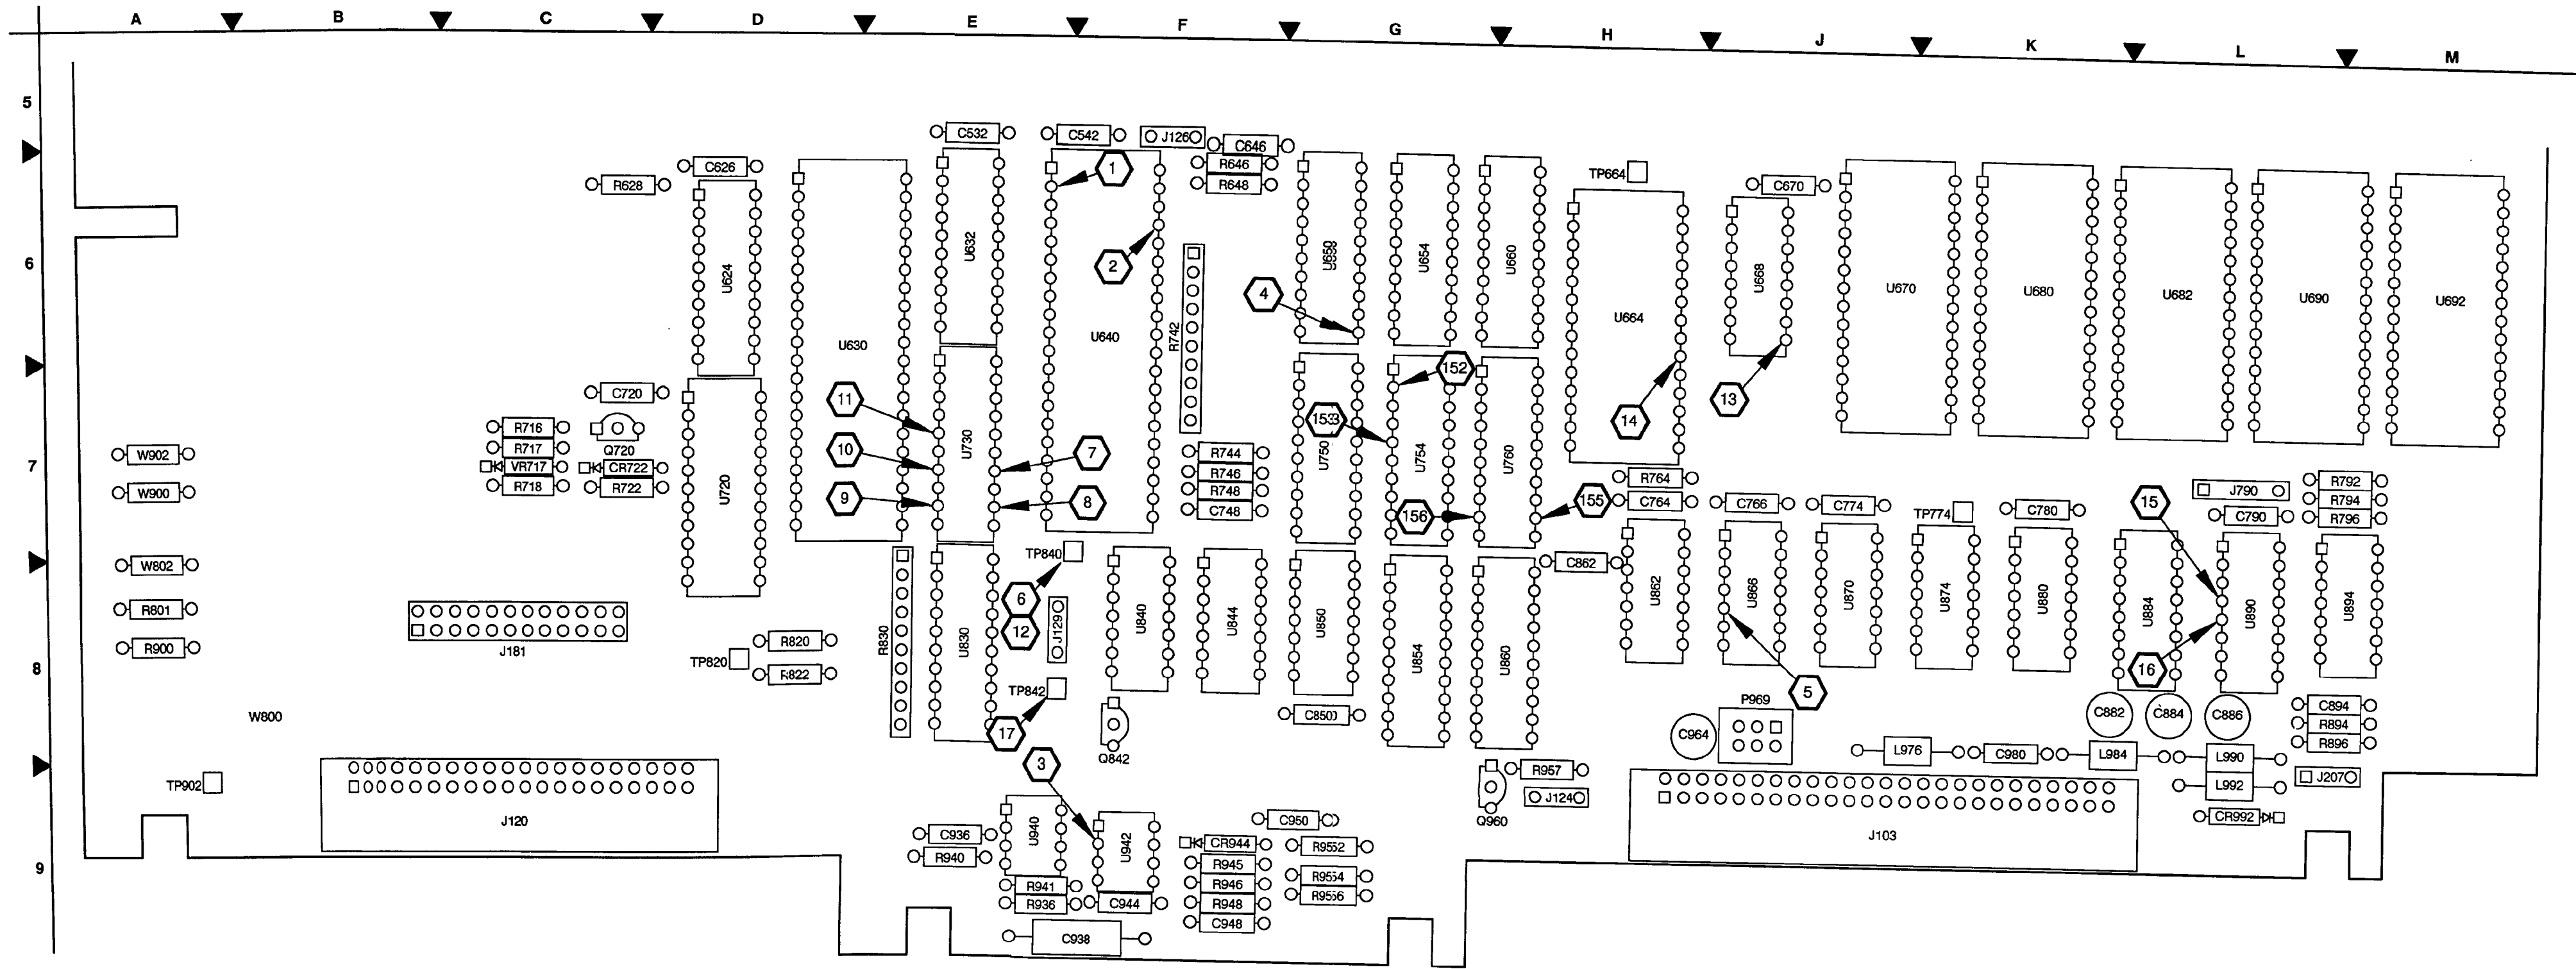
A12 Processor Board Component Locator (Sheet 2 of 2).
